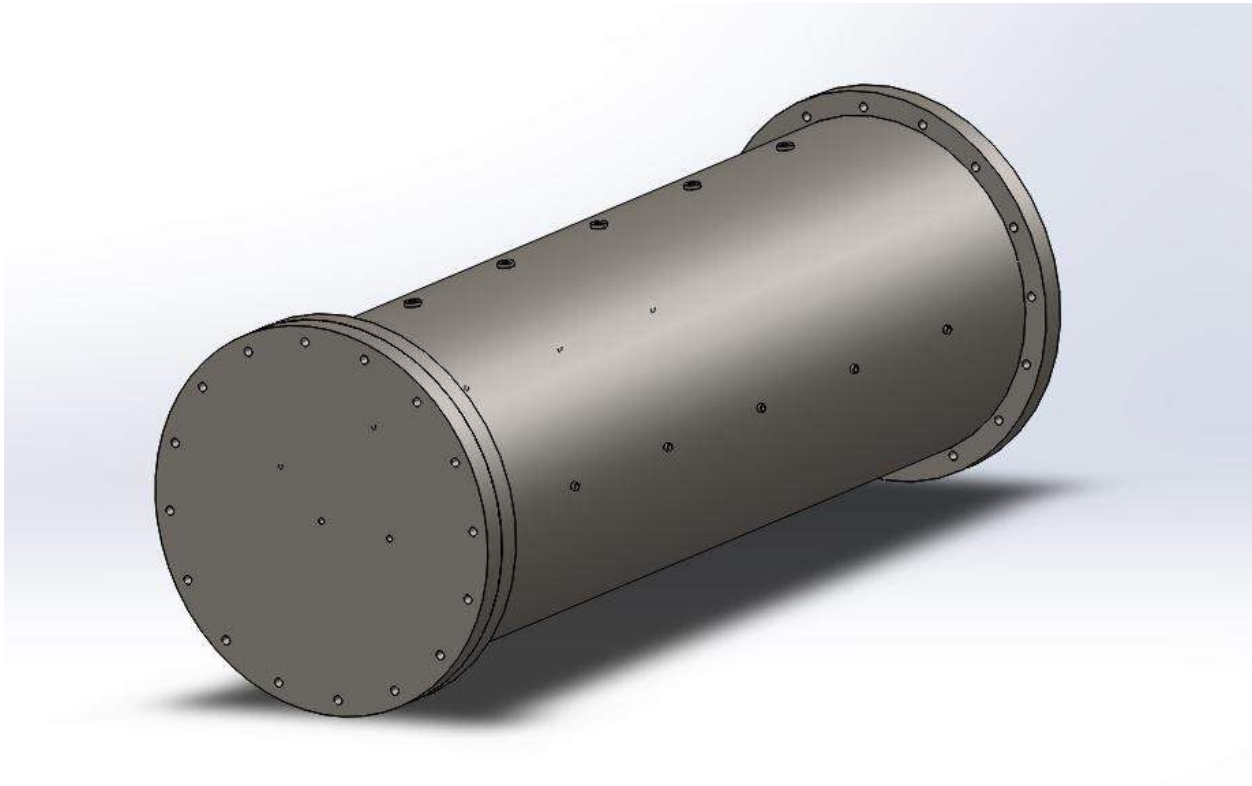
Three-dimension CAD conceptual drawing of the explosion pressure steel reactor .
